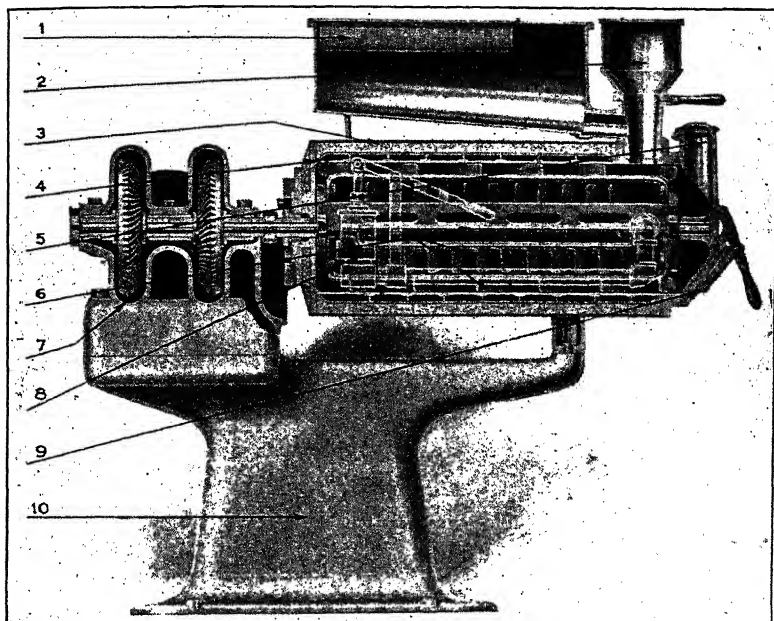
Section of brine-cooled ice-cream freezer: 1. strainer in mixing tank; 2. fruit funnel; 3. heat-insulating material; 4. spiral passage for brine around freezing cylinder; 5. peep hole; 6. blades of dasher; 7. driving gears; 8. "phantom" view of brine valve. 9. Opening for removing ice cream.
